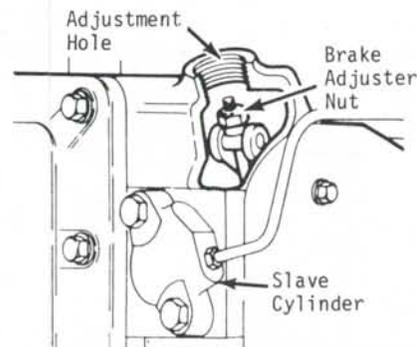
On Models 1490, 1494, 1594 and 1690, remove plug from adjustment hole in final drive housing for access to brake adjuster nut.
